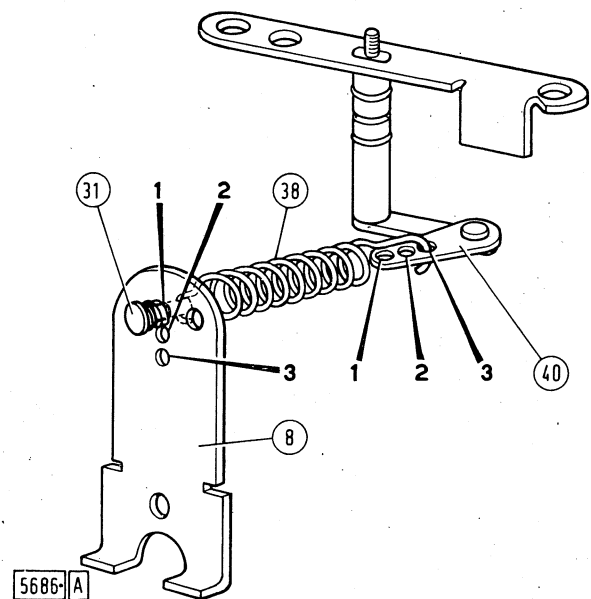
Attaching holes of control spring (38) in throttle arm (40) and control arm (8) through the spring guide (31).
